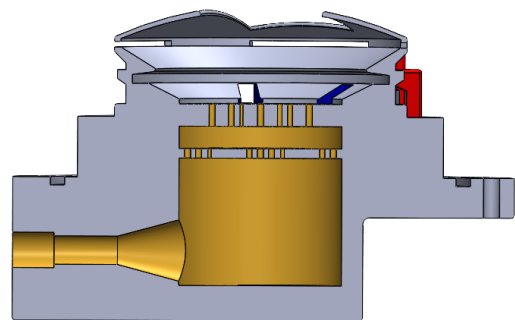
Side view of injector geometry showing inlet, plenum, and hole arrays.
